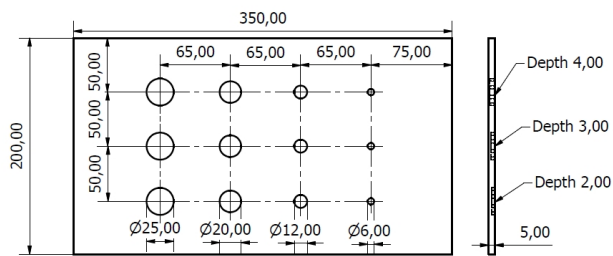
Technical drawing of the Flat Bottom Hole plate.
